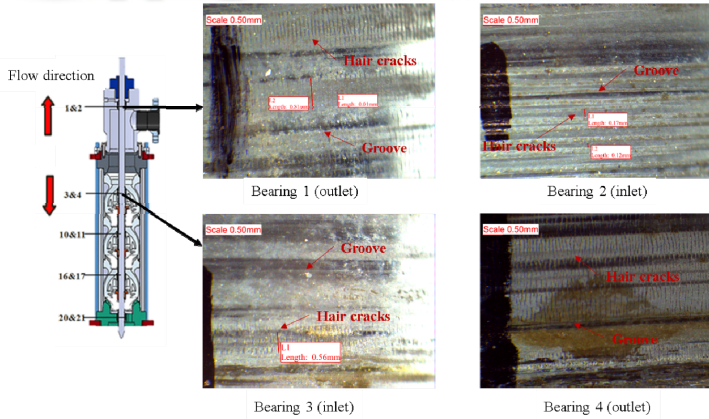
Microscopic examination of the bearing (journal) surface for the exit bearings at 117 hours.
